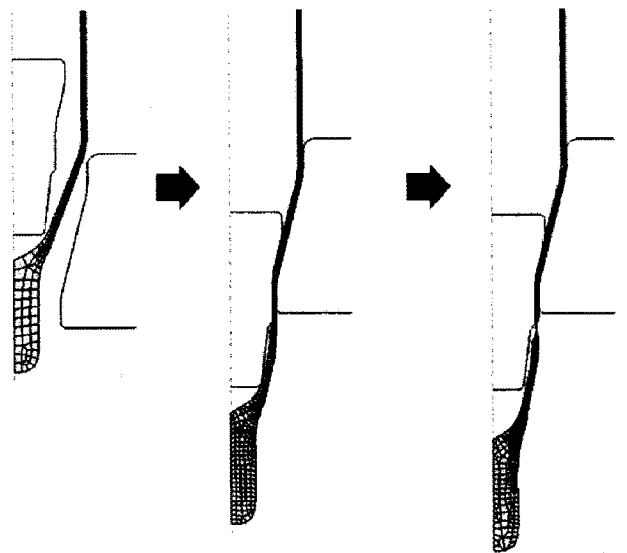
Deformed geometry of 1 stage drawing process with ductile fracture
